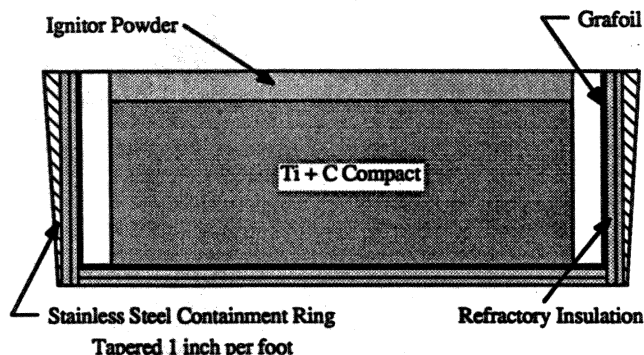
Schematic diagram of the specimen containment assembly with green compact.
